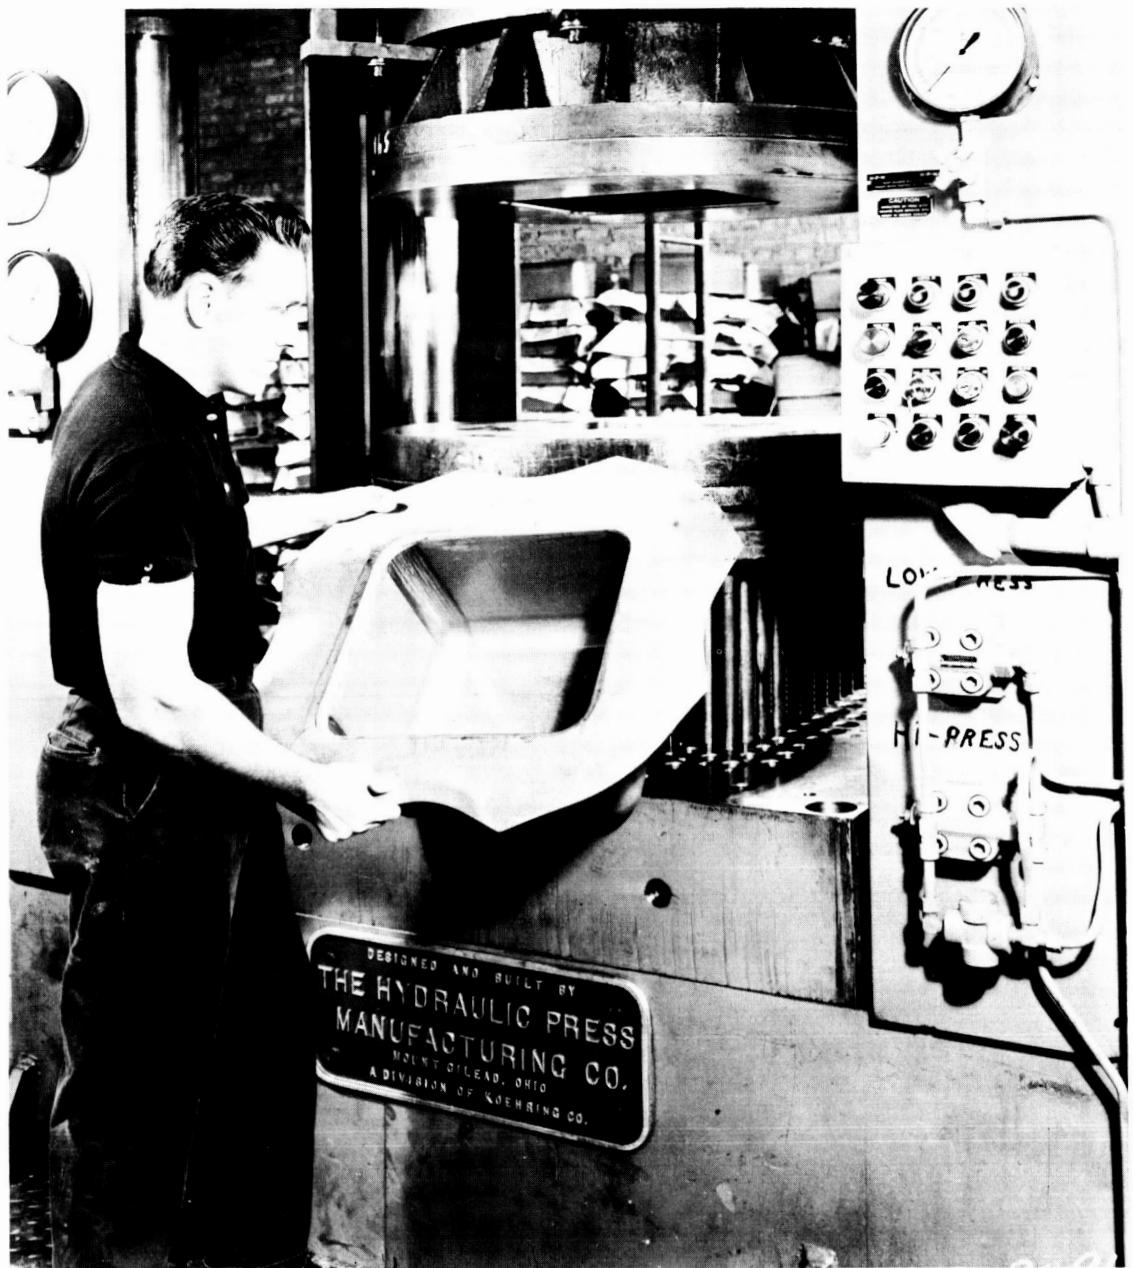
AN 800-TON PRESS EQUIPPED WITH A 600-TON DIE CUSHION USED FOR DRAWING STAINLESS STEEL SINKS
